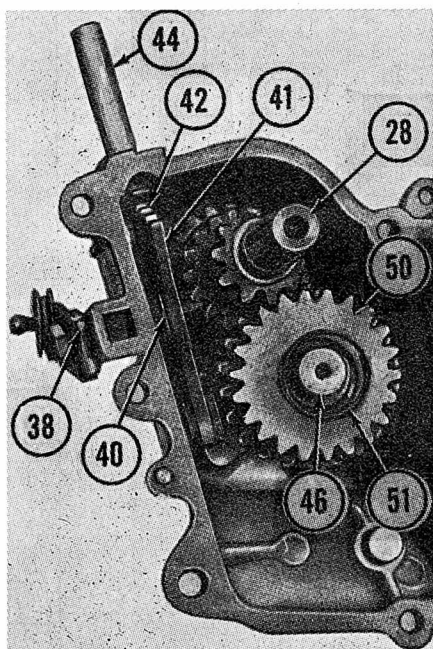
View of transmission gears and shafts installed. Refer to Fig. A2-7 for legend.
